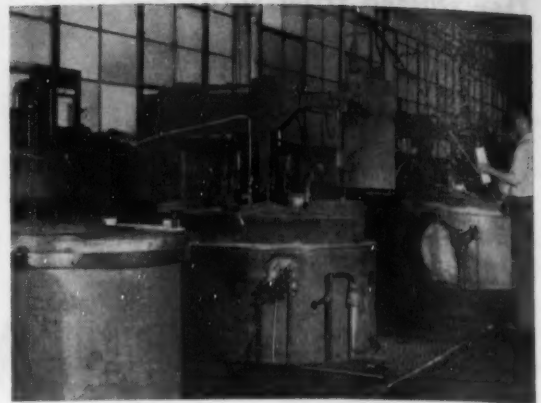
Operator hoisting work containers used for carburizing. Three baskets make up a furnace load. Lifting straps, attached to the basket, enable the operator to pick up the load easily. L & N controls are at the rear. Cooling tower, center left, is followed by Two Homo-Carb units at right. Department occupies 4500 sq ft.
